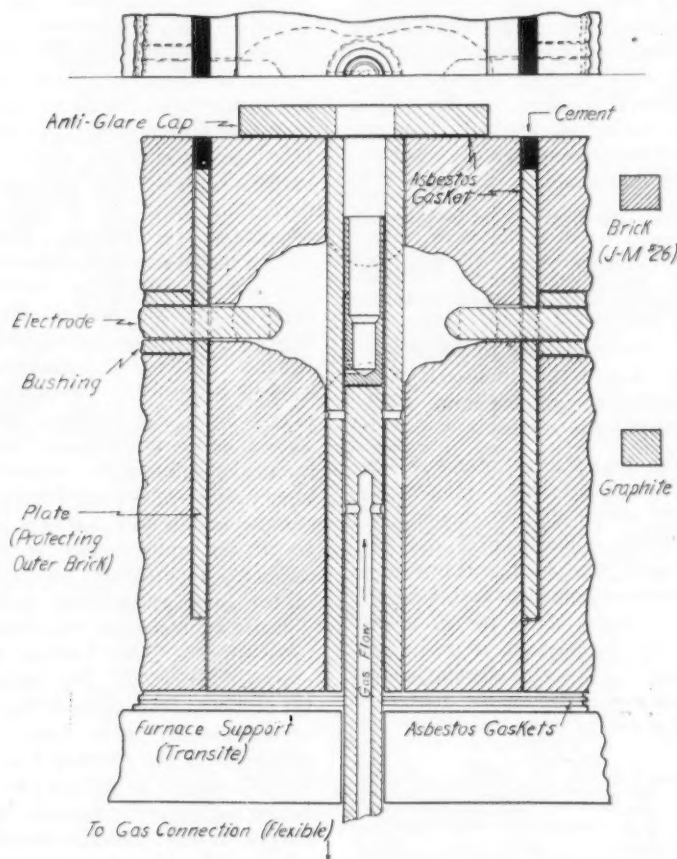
Improved Laboratory Arc Furnace for Heating Crucible-Mold.
